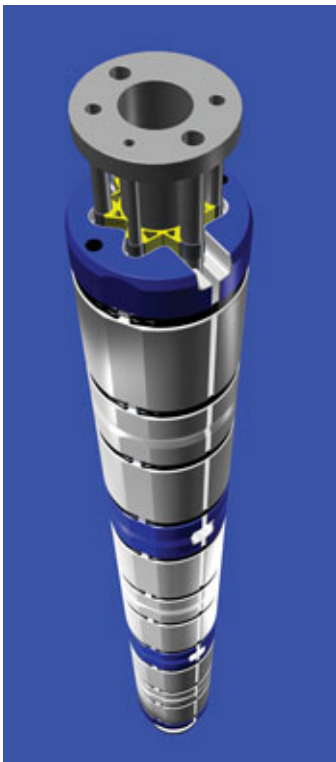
Typical riser joint with foam buoyancy elements [13]
